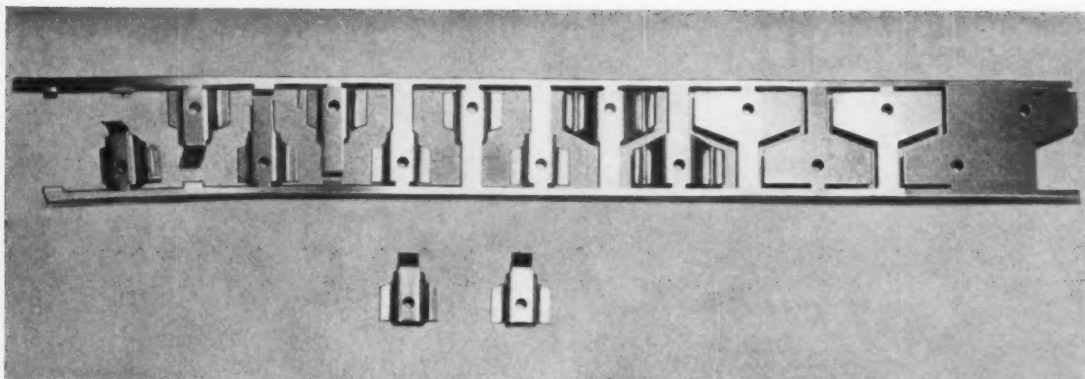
Die operations on the hood bumper bracket can be seen in this steel strip. After the neck of the part has been freed, the work is advanced by a single tab and a carrier strip.
